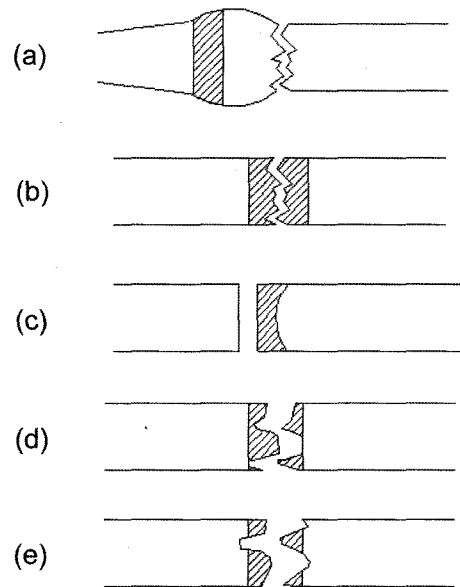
Representation of some typical failure modes in tensile tests of brazed systems. (a) base metal, (b) brazing interlayer, (c) base metal/filler metal interface, (d) base metal/filler metal interface and brazing interlayer, and (e) base metal and interlayer.
